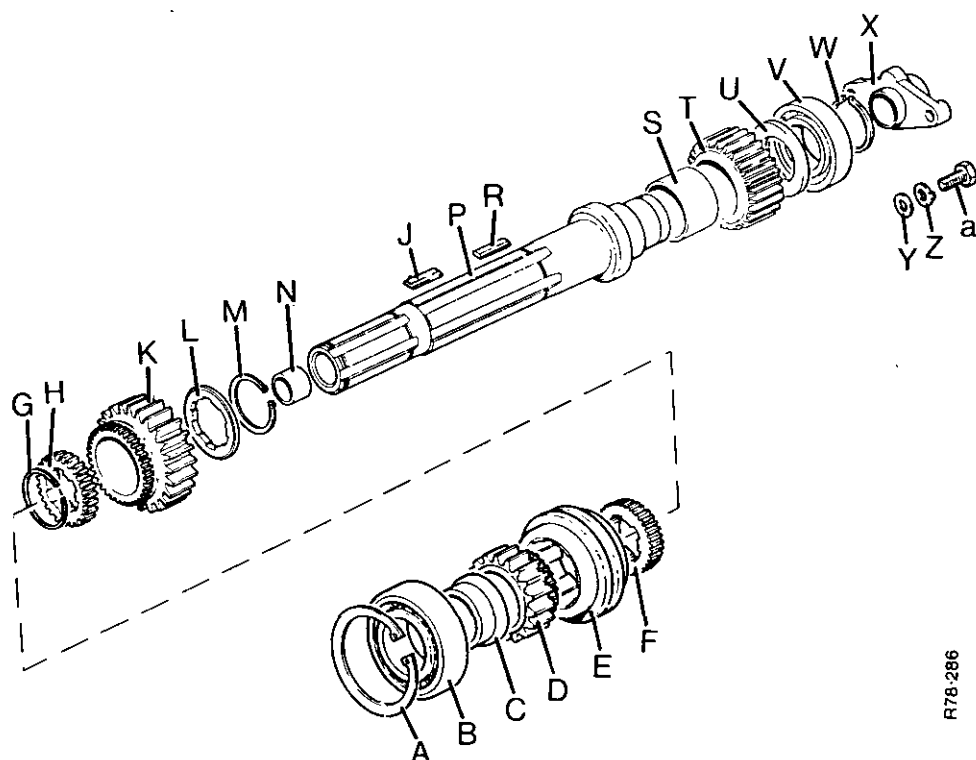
TOPSHAFT ASSEMBLY 1410 TRACTOR
